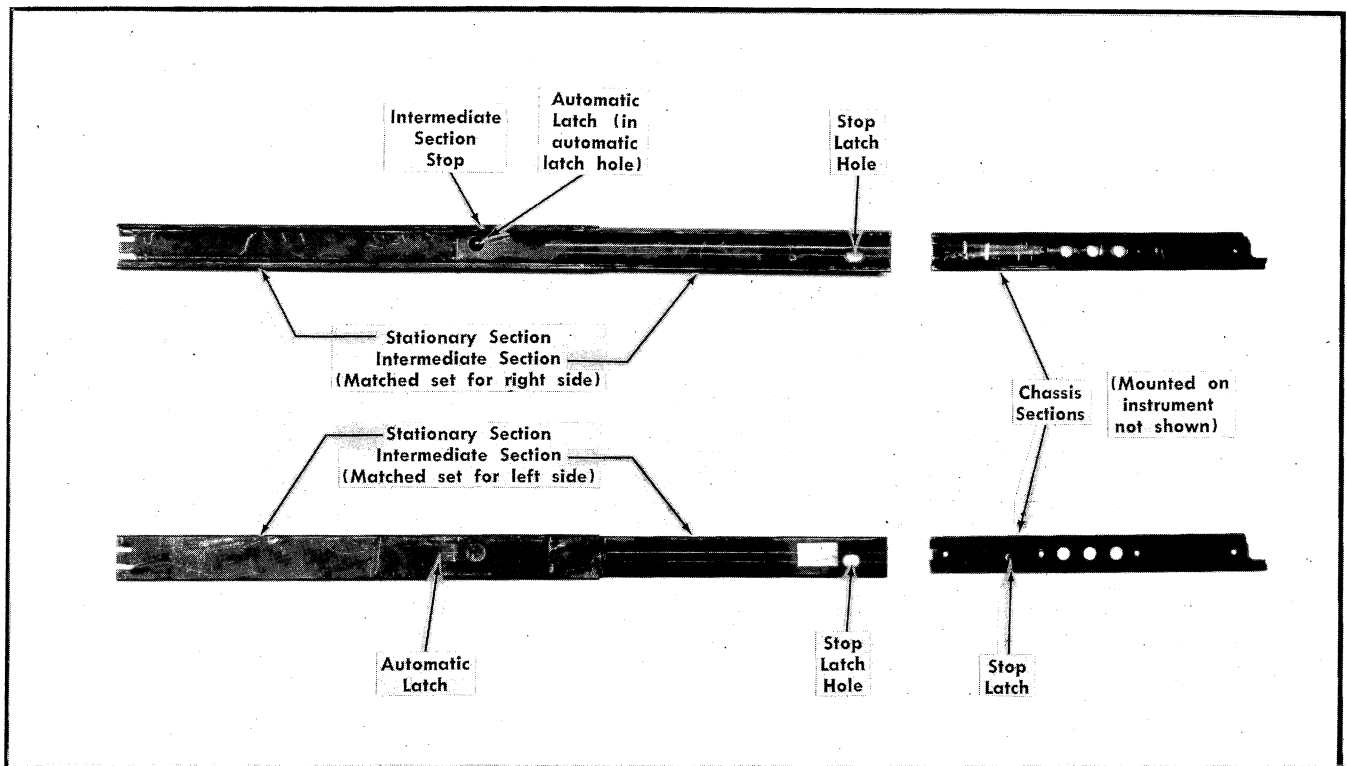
Illustrations showing the 1 3/4-inch wide slideout track assemblies.
